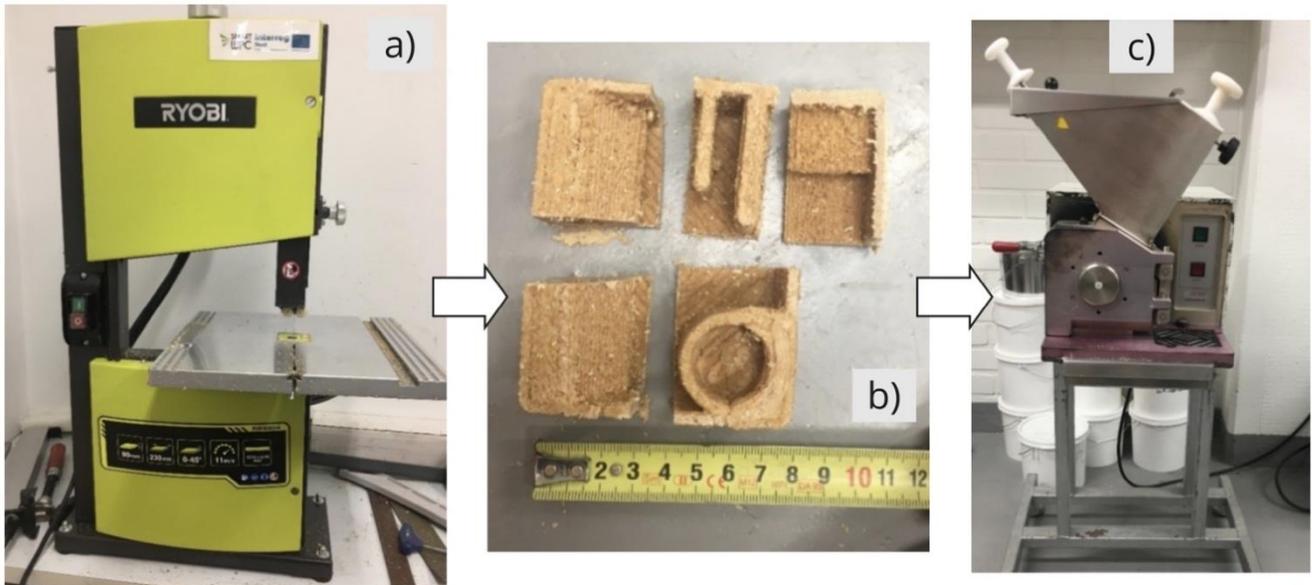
a) Used band saw in cutting process, b) Cut 3D-printed waste samples and c) Grinder machine used in the grinding process
